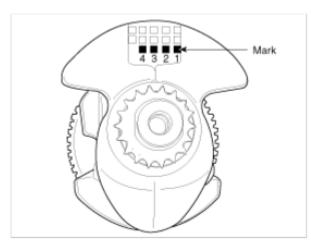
Crankshaft Pin Diameter Mark Location Courtesy of HYUNDAI MOTOR AMERICA
